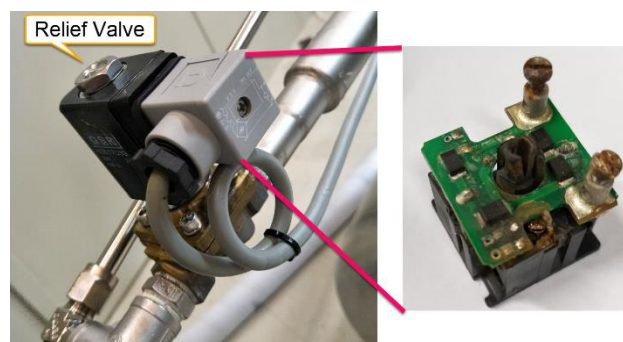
Pressure relief solenoid valve and the corroded PCB inside.
